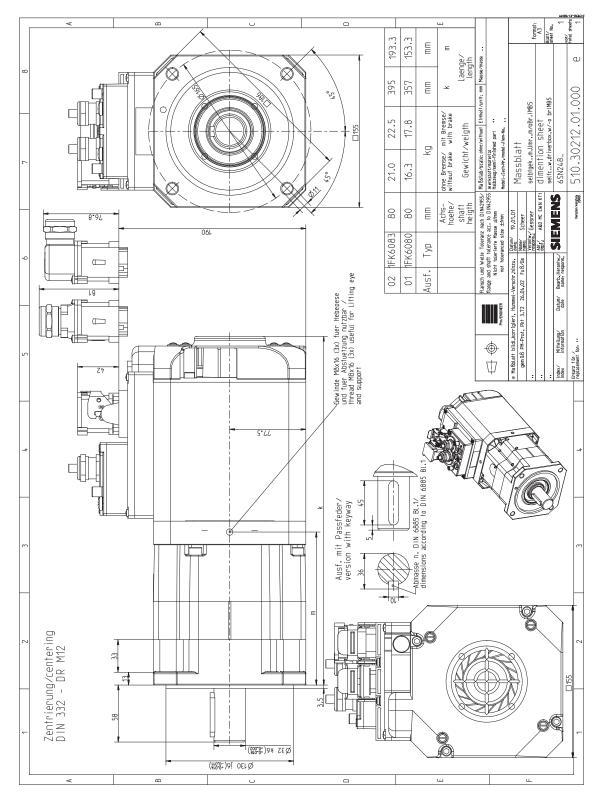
Dimension drawing POSMO SI 6SN248 –2CF00–0G –
